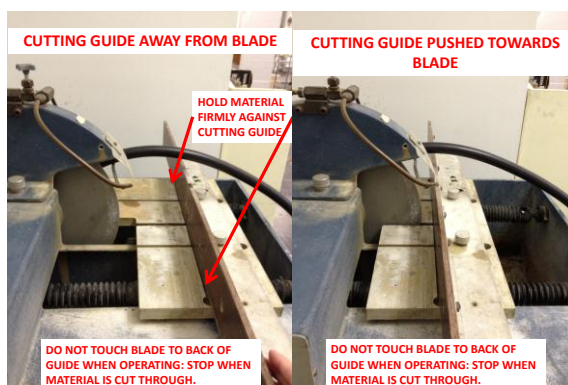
Saw and cutting guide alignment. Material to be cut is placed firmly against the back of the cutting guide and held firmly during cutting process.
